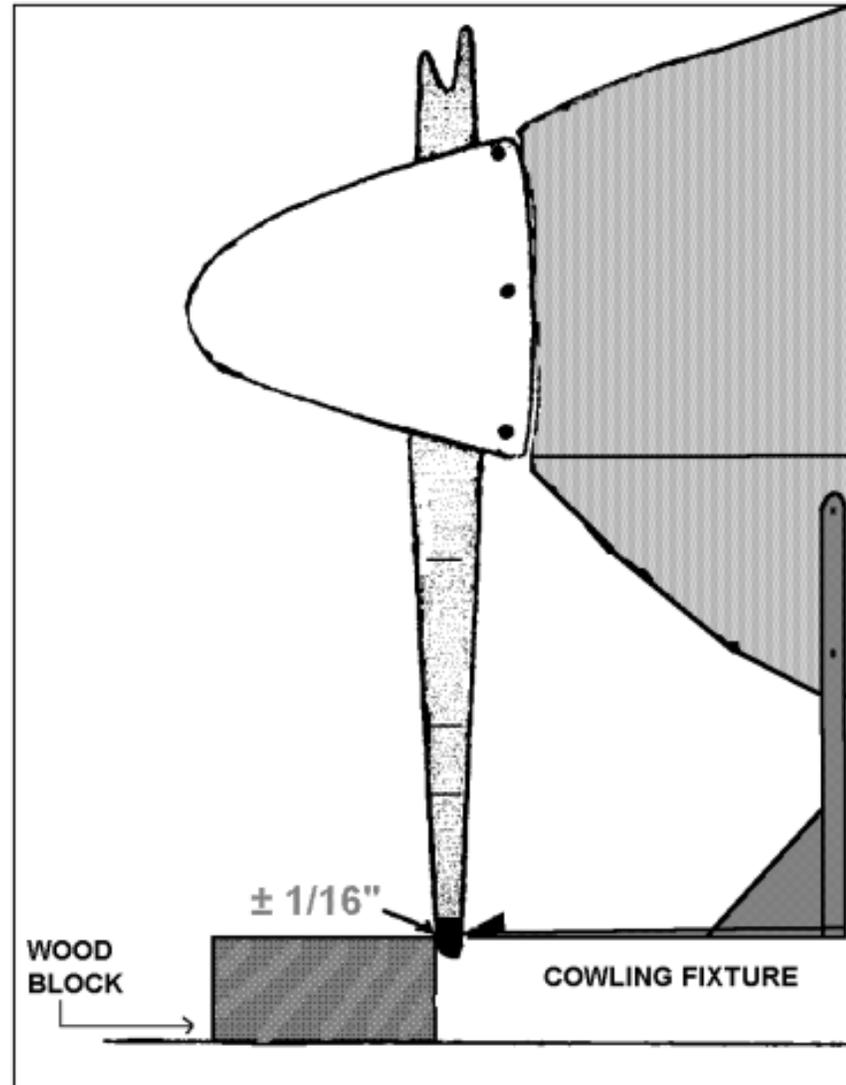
Propeller tracking (wood block or cowling fixture shown).
